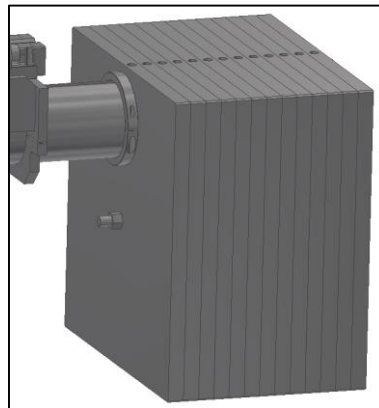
Assembled counter weight bank of Wisconsin Tooling (University of Wisconsin, 2001).
